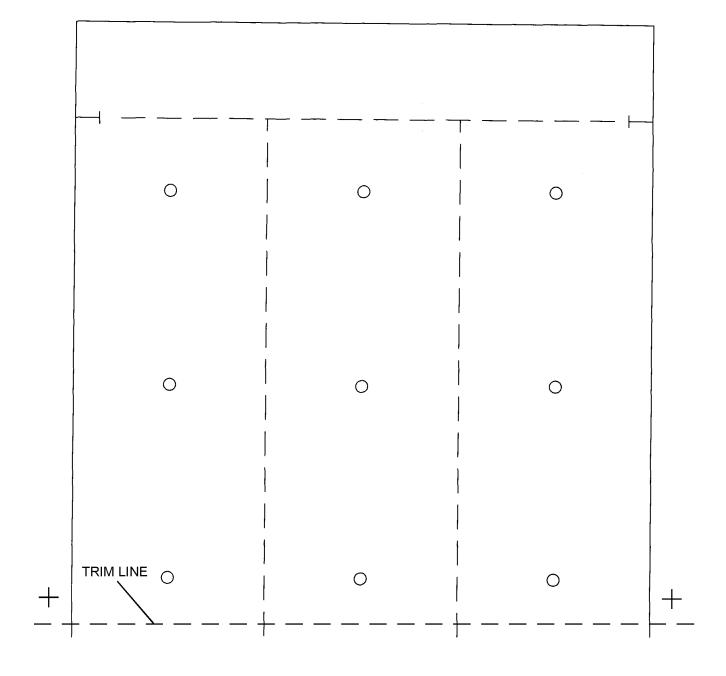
Pistol Pocket Snap Fastener Panel Pattern (Sheet 2 of 2)
